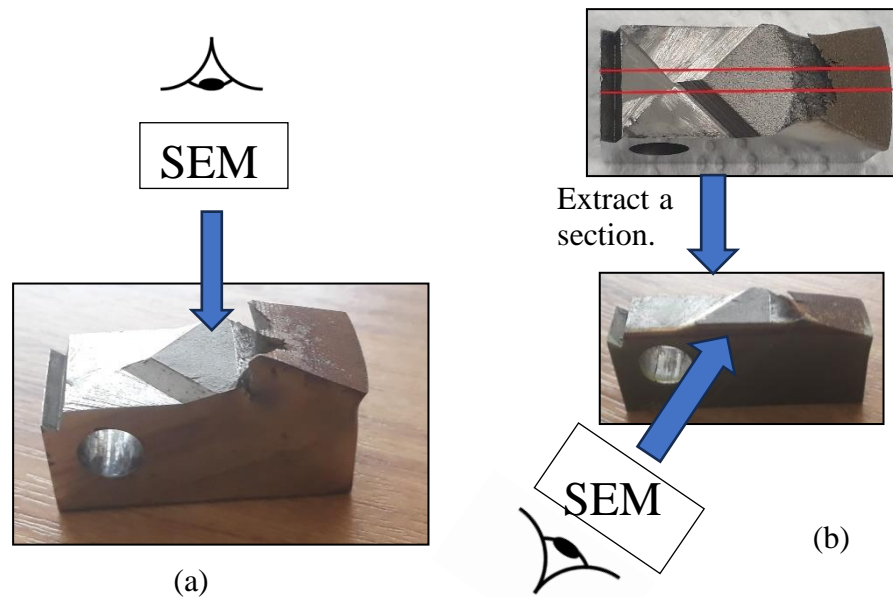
Types of fractographic observation (a) Type 1-fracture surface and (b) Type 2- crack path.
